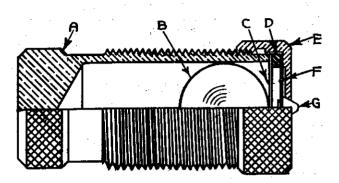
Contact Assembly for Directional Unit of IBC Relays
